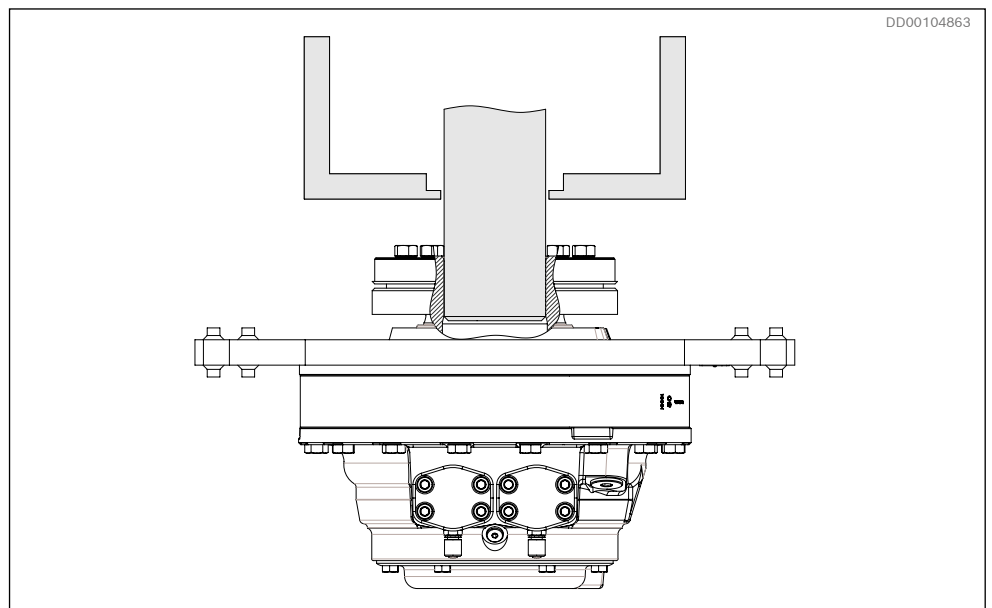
Vertical mounted coupling motor with double ended torque arm DTCA
